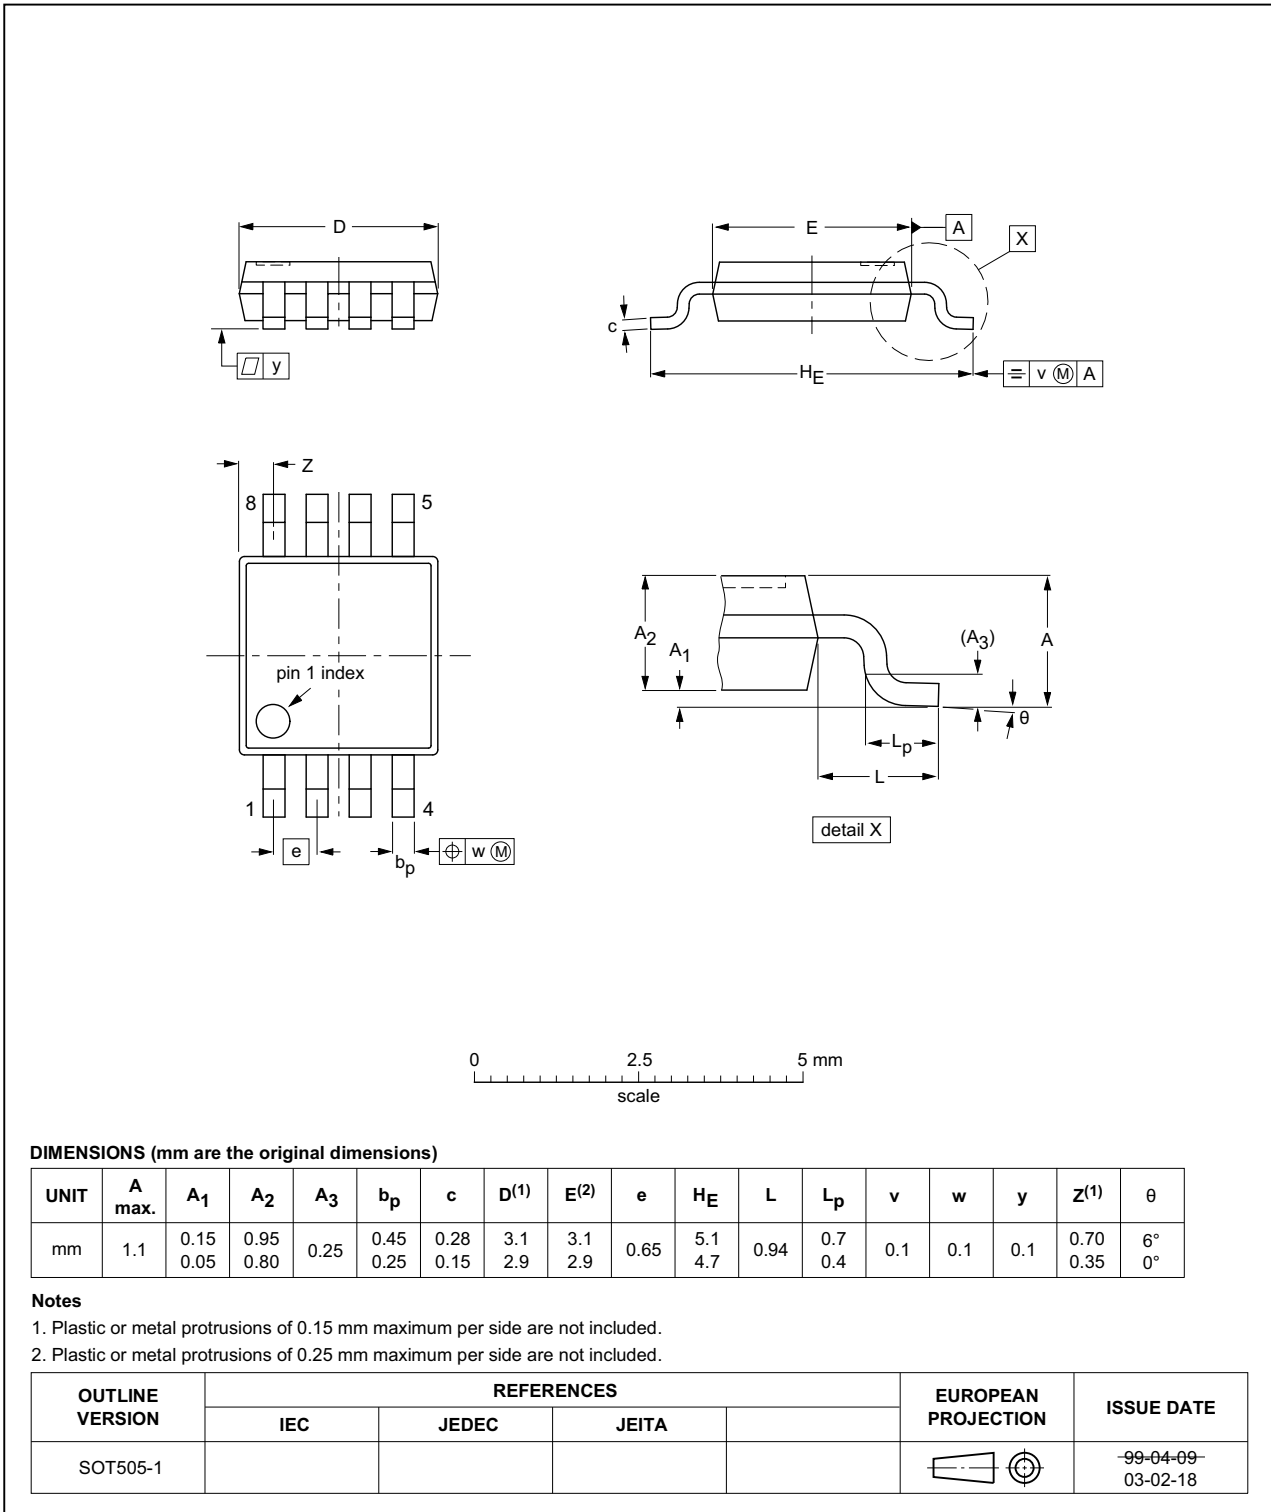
Package outline SOT505-1 (TSSOP8), PCF85363ATT
